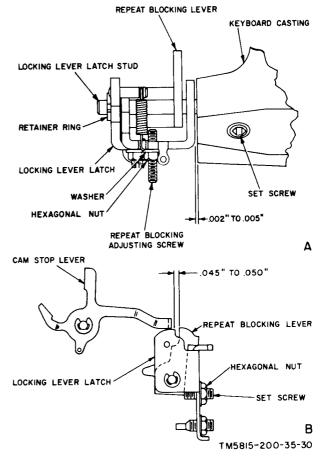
Locking lever latch end play and repeat blocking lever adjustment.
